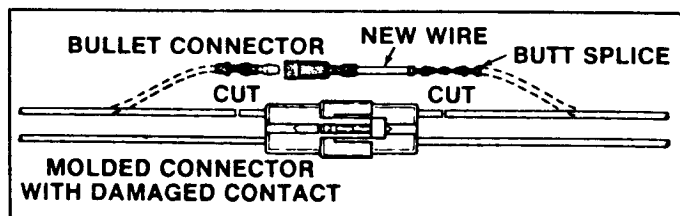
BYPASSING MOLDED CONNECTOR WITH BULLET CONNECTOR
